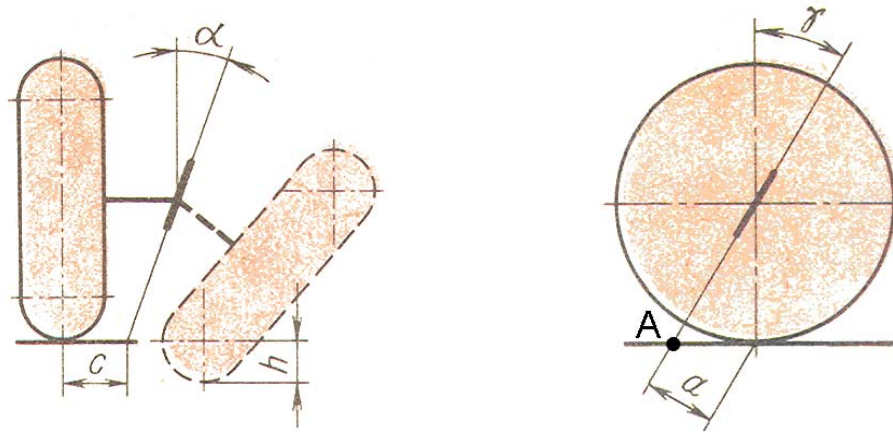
Installation angles of front wheels and steering knuckle pivots:
